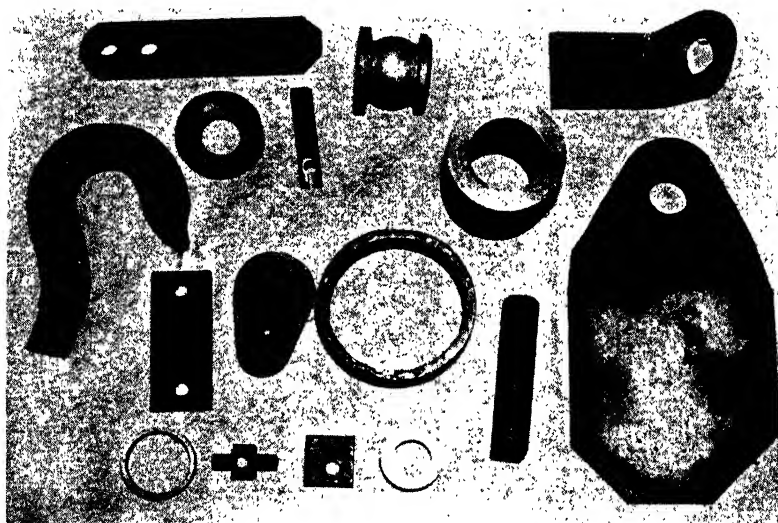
These parts are a few examples of premachined parts that will be welded into fabricated structures and will save machining of the entire structure because they are premachined. Note that they are taken from ordinary rolled steel bars, plates, shapes, and tubes. (*Courtesy of R. G. LeTourneau, Inc.*)
